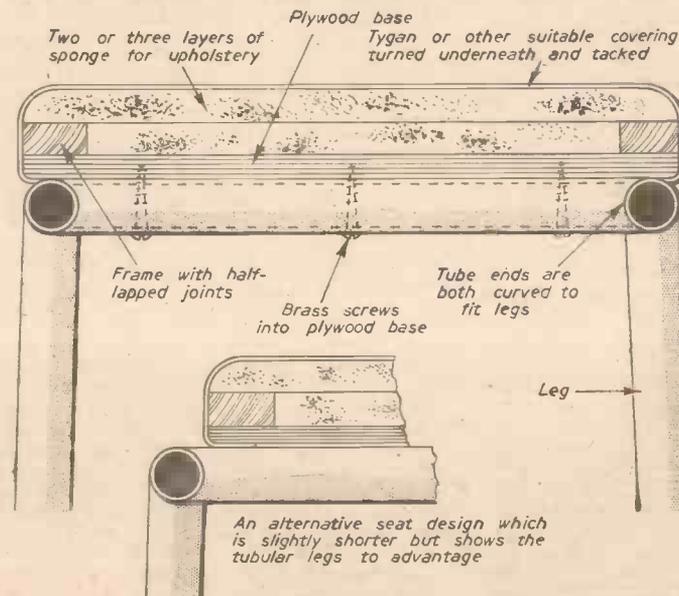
A cross-section through the seat illustrating the method used for attaching it to the frame.
